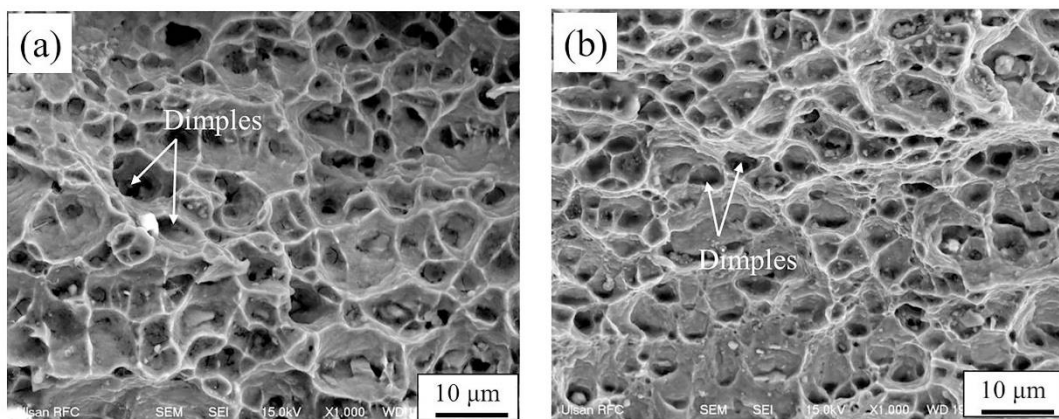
SEM image of tensile fracture surface: (a) BM, (b) all-weld joint
